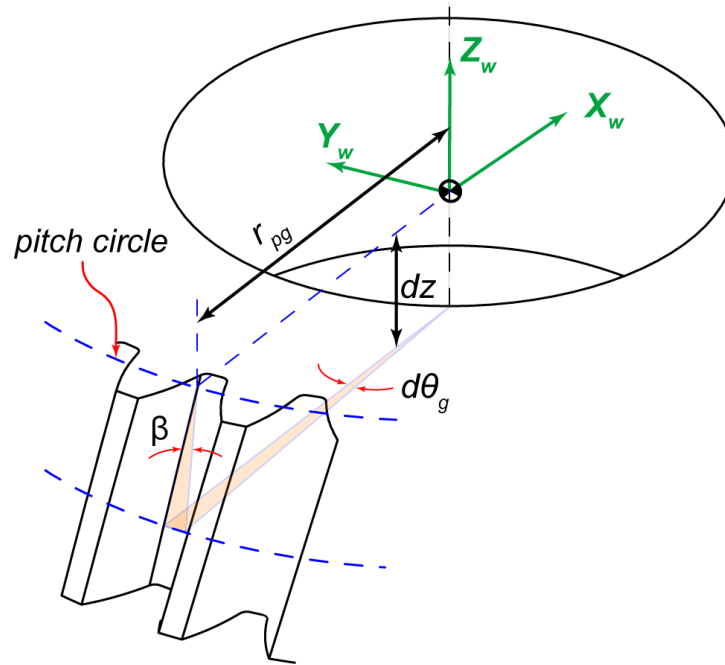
Additional rotation of the helical gear to ensure a proper meshing condition
